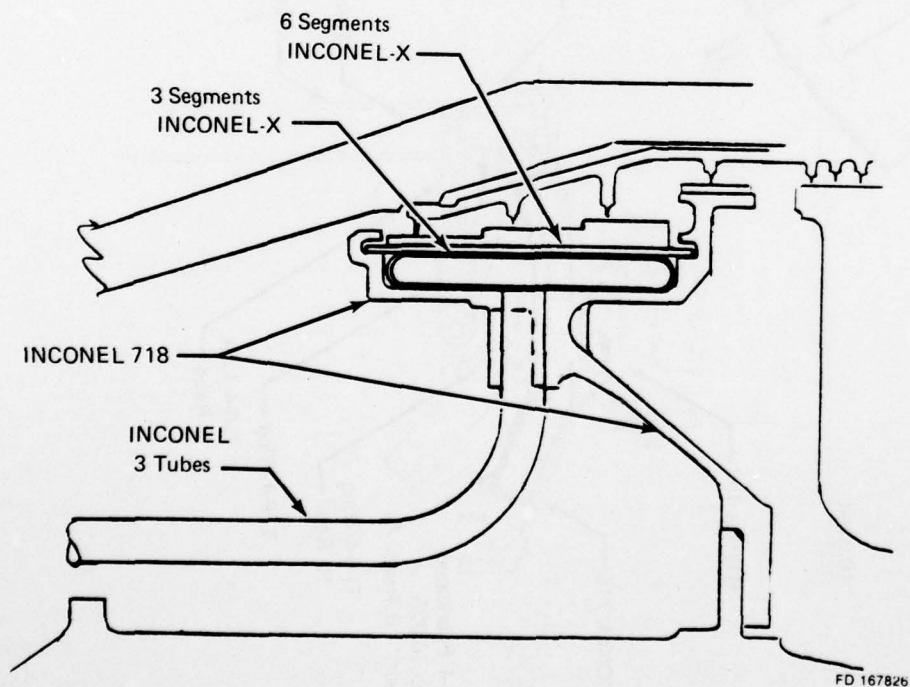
Scheme No. 18, Rear Compressor Seal (2 Position), Sketch No. 28
